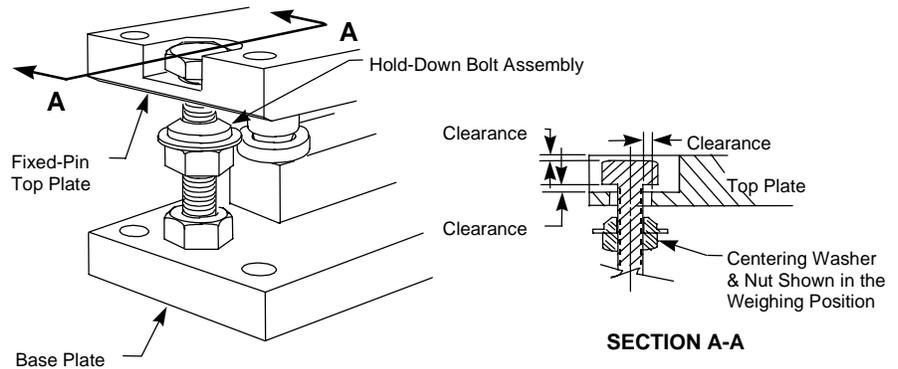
Flexmount Hold-Down Bolt Assembly
